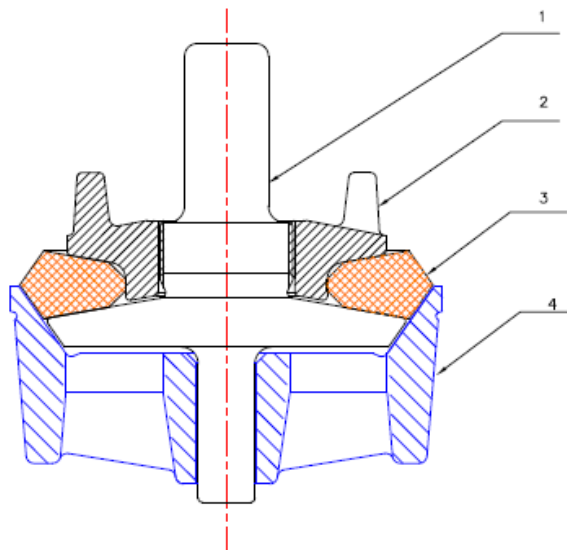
Three/ Four web valve: 1. Valve body; 2. Valve nut; 3. Valve insert; 4. Valve seat
